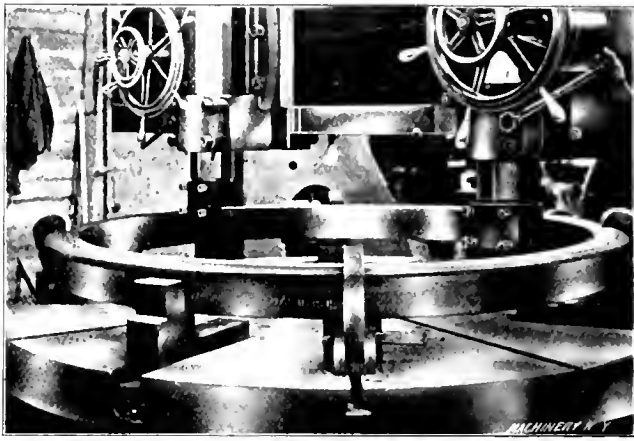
Driving Wheel Tire held in Place on the Boring Mill by Hook-clamps
